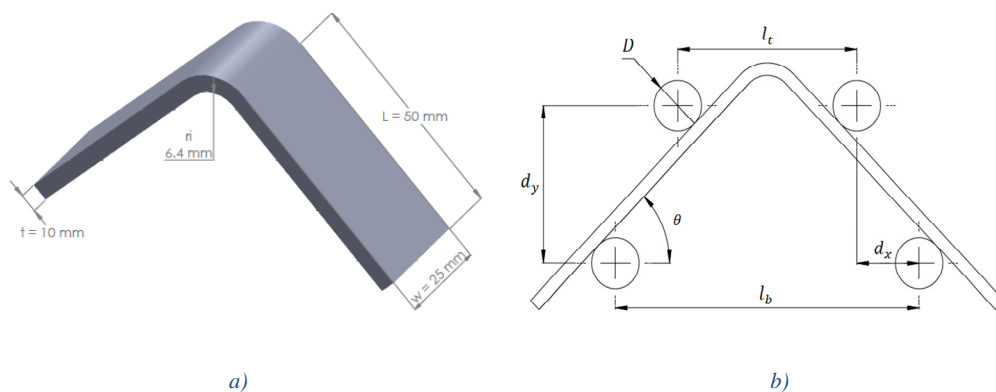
Specimen geometry (a) and test setup (b) to measure ILTS under ASTM D6415.
